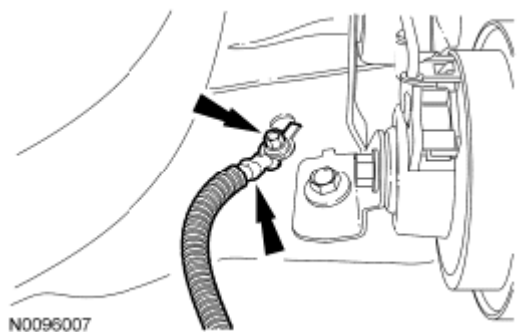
Locating Bolt & EPAS System Wiring Harness Ground
